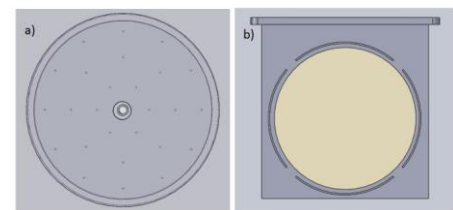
a) showerhead gas inlet; b) circular groove gas outlet
